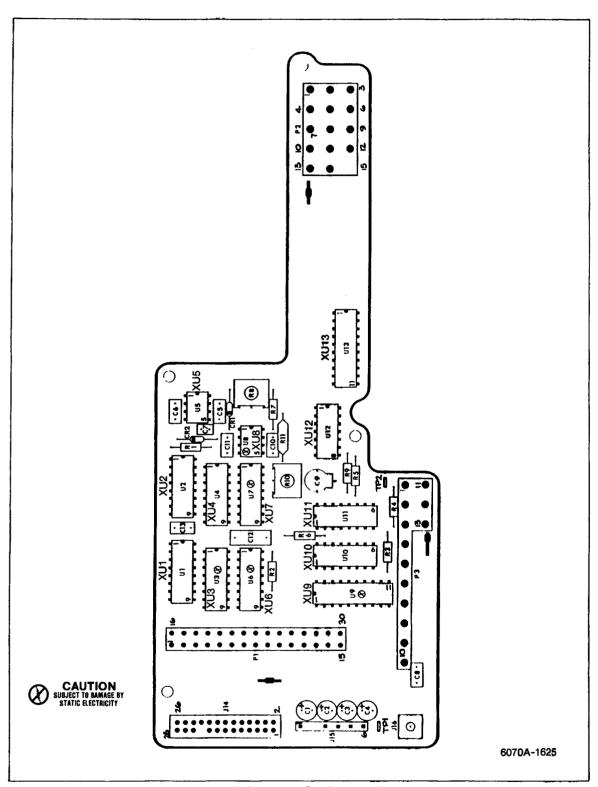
A3A9 Synthesizer Distribution PCB Assembly
